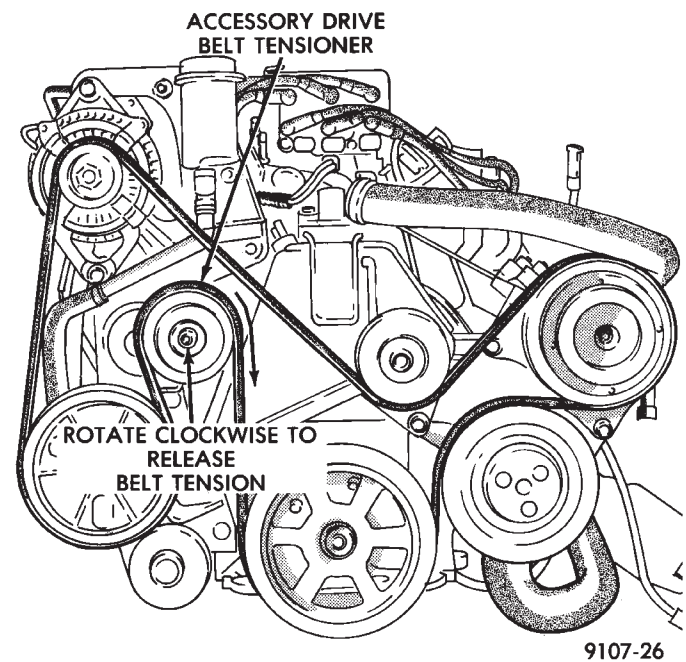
Accessory Drive Belt—3.3/3.8L Engines
